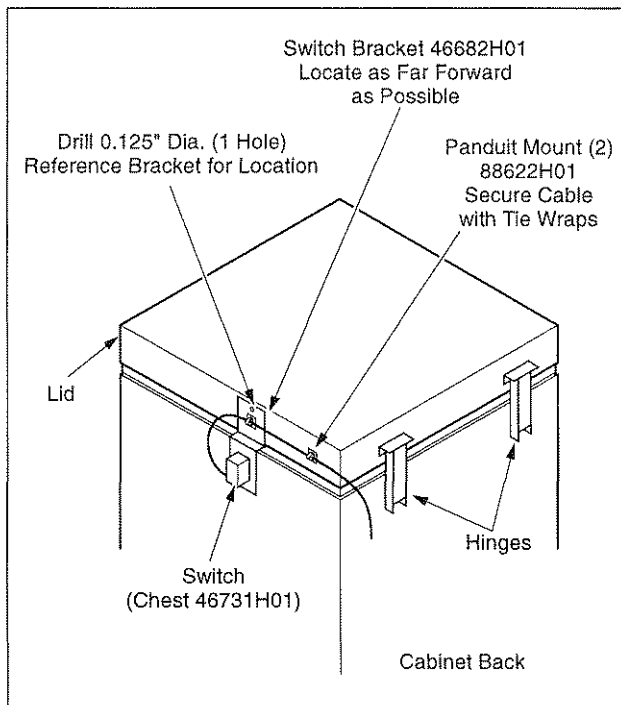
Positioning Switch Bracket (Chest) on 390 without Switch Bracket Location Holes on Back of Cabinet
